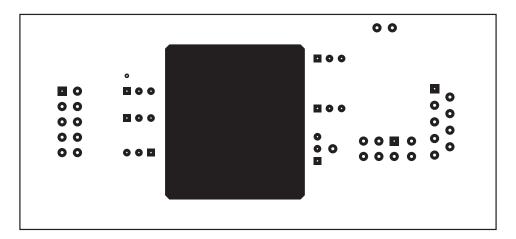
Low EMI Demo Board Layout (DC1746A), Inner Layer 1
